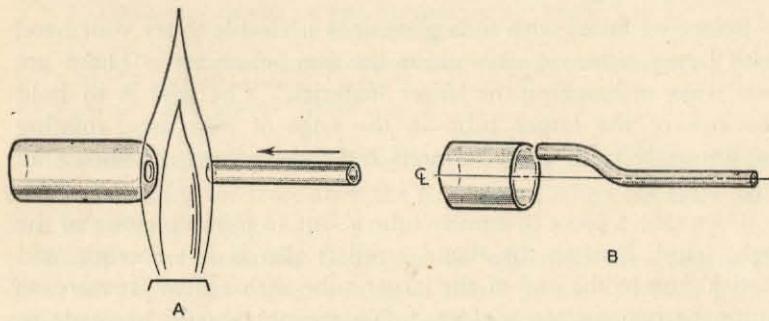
METHODS OF MAKING "POINTS" IN LARGE TUBES
